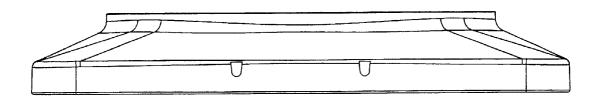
is a bottom view of the combined fan assembly and shroud portion shown separately for clarity of illustration.
